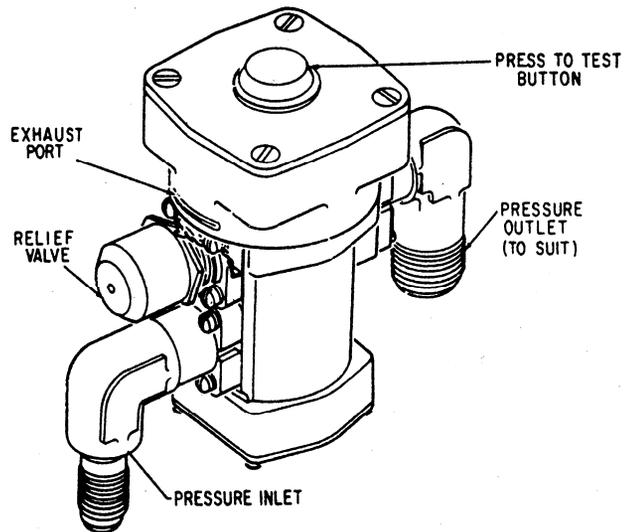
Anti-g pressure regulating valve (single stage)
